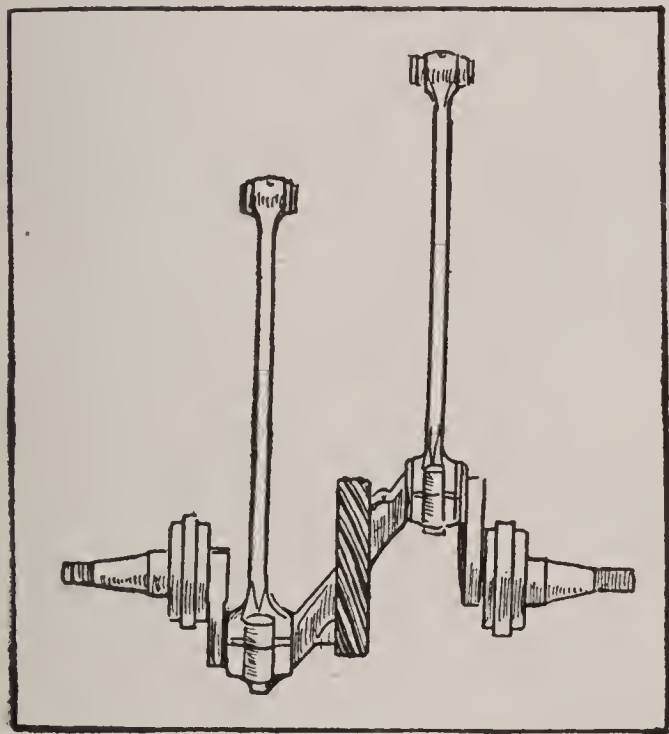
Crankshaft Arrangement of Triumph Two Cylinder Vertical Engine.
